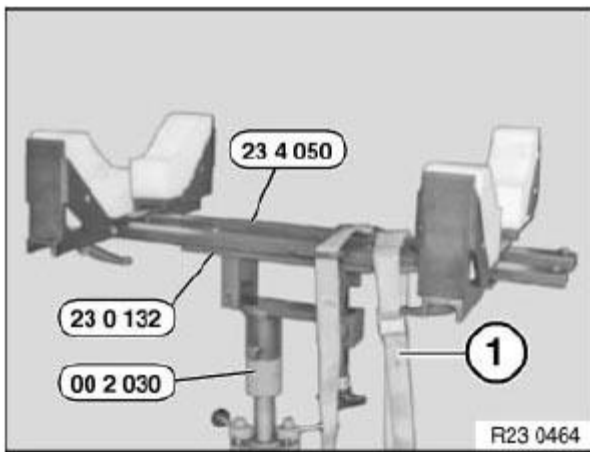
Identifying Special Tools (00 2 030) And (23 4 050)
